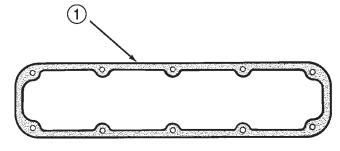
Cylinder Head Cover Gasket V-8 Gas Engines 1 – CYLINDER HEAD COVER GASKET
